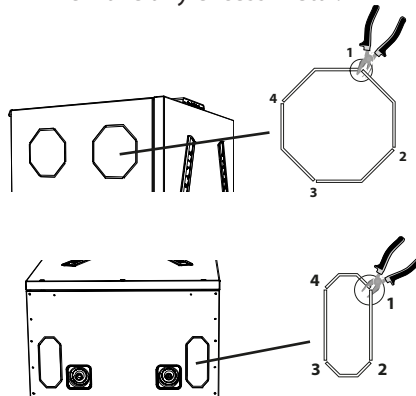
Opening the air duct connections: side connection (top figure) and bottom connection (bottom figure)
